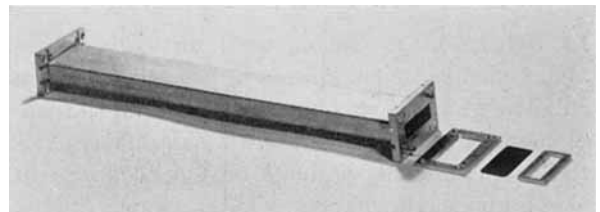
Exploded view of Teflon window assembly at flange end of a section of wave guide (courtesy of the *Microwave Journal*).
